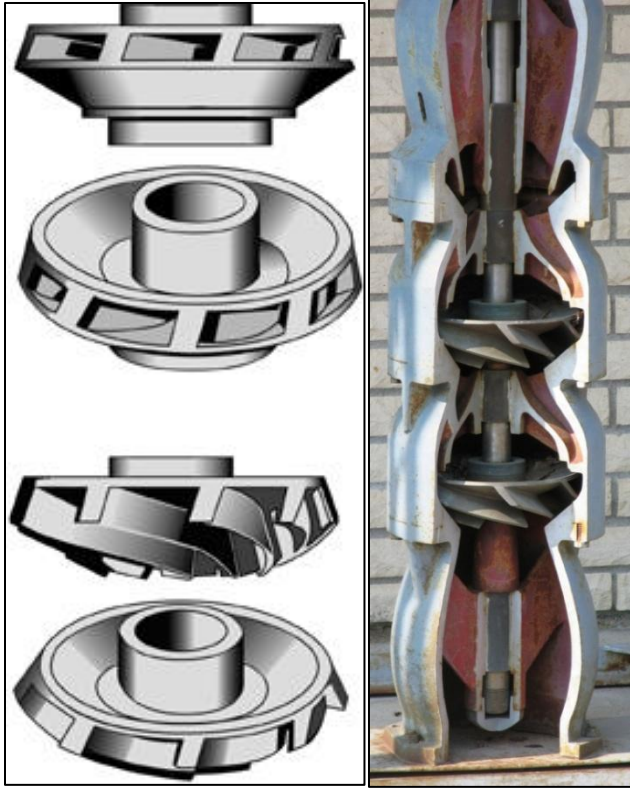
Turbine pump impellers and two-stage bowl assembly cross-section.
